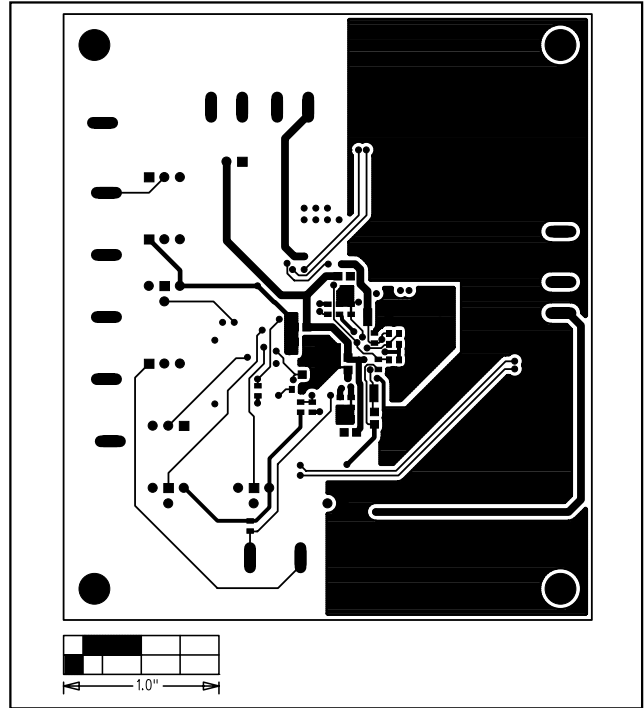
MAX1541 EV Kit PC Board Layout—Solder Side
